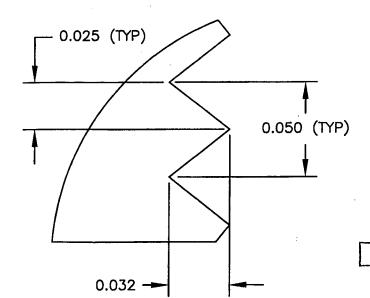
DETAIL B: RIDGE DETAILPARTIAL SECTION SCALE 1:20
